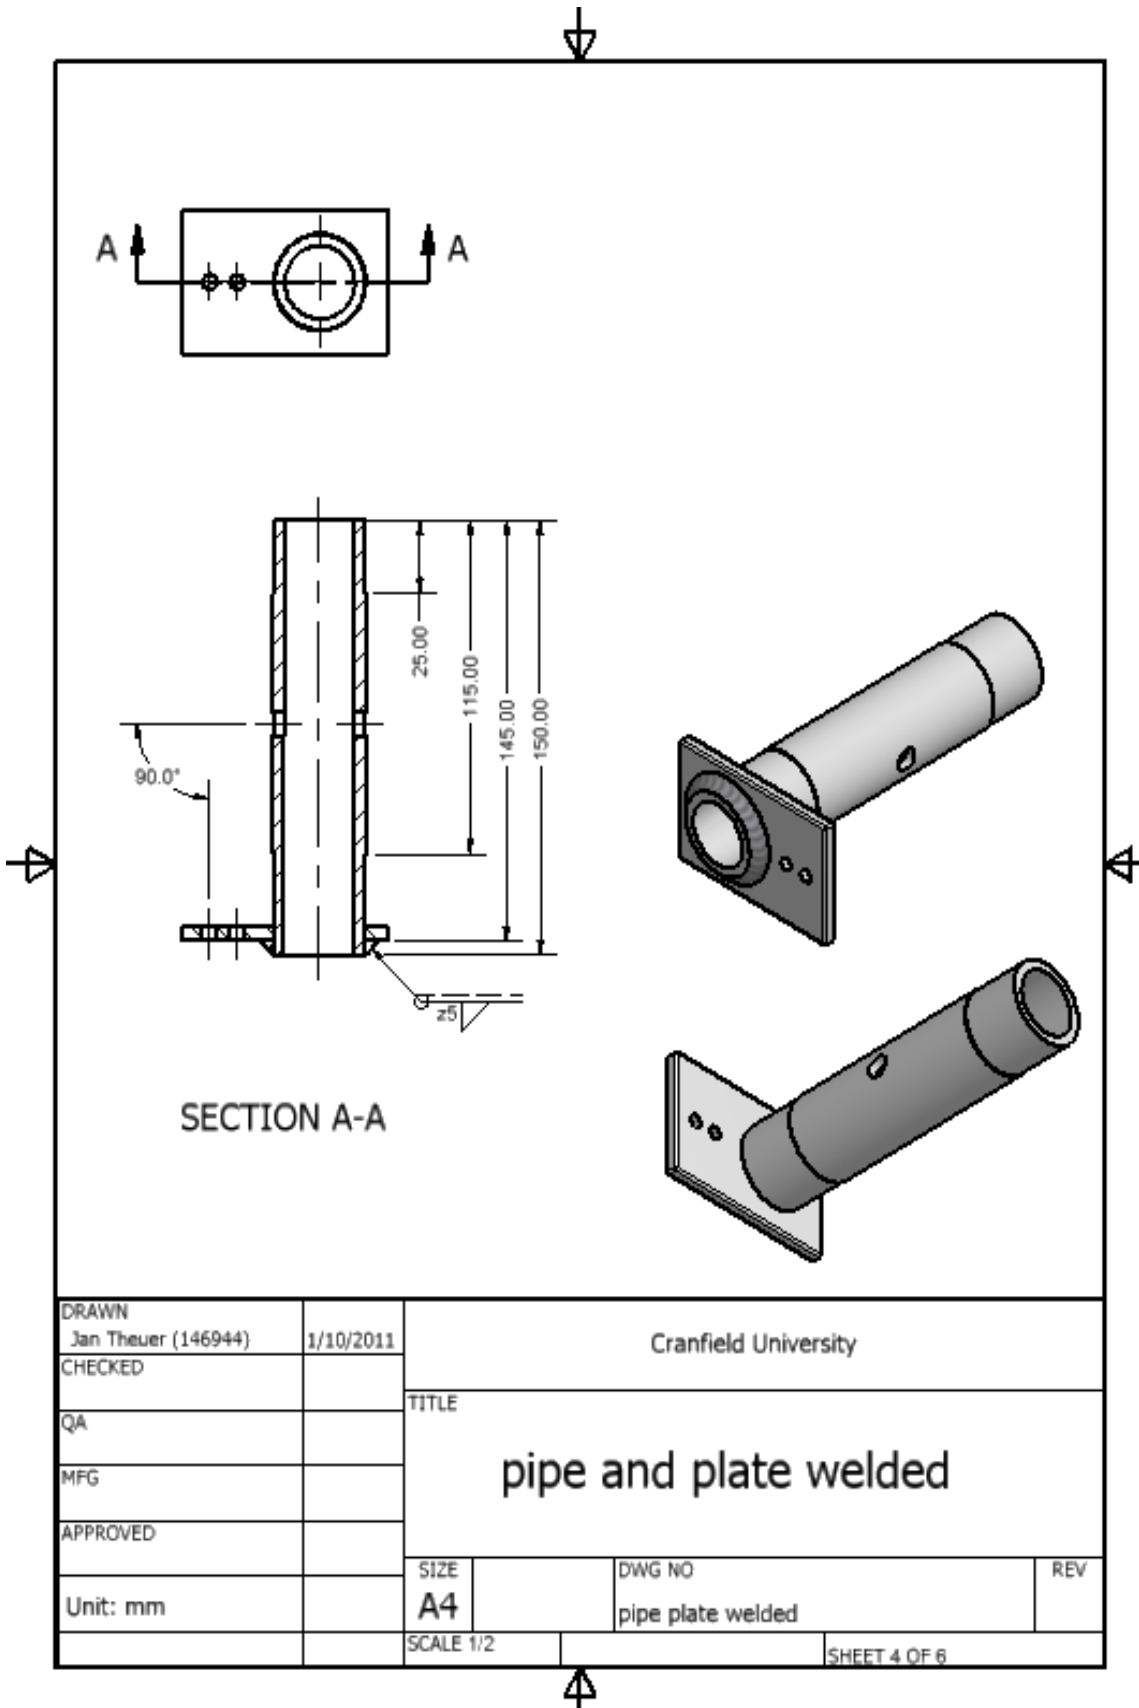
Technical drawing of the pipe and plate working angle welded
